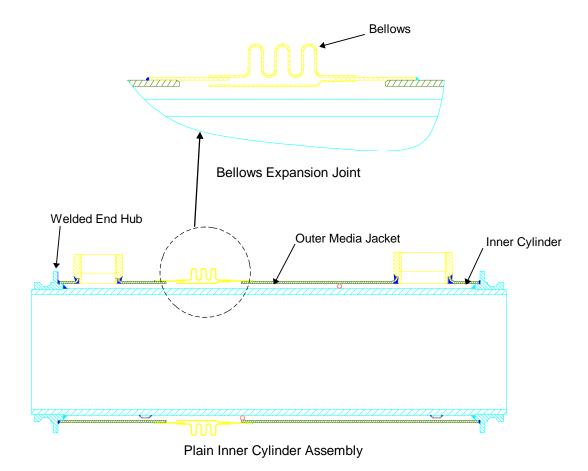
Bellows Style Expansion Joint For A Plain Inner Cylinder Assembly
